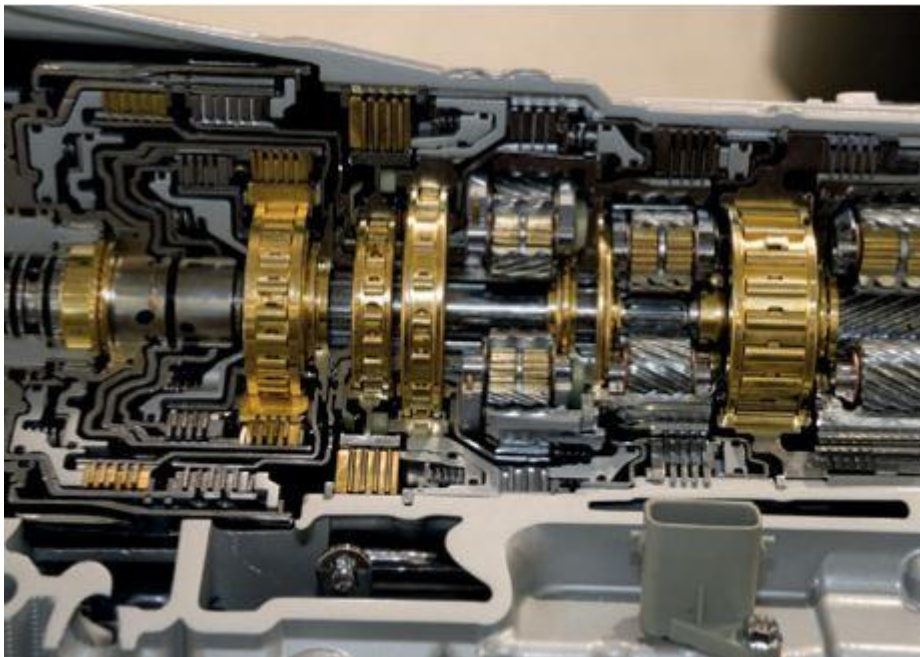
Automatic gearbox internals (Hillier, 2012)
